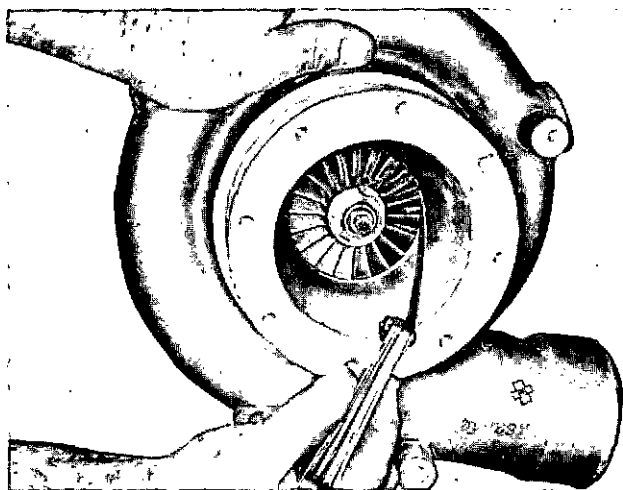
, (T3522). Checking the compressor wheel radial clearance
